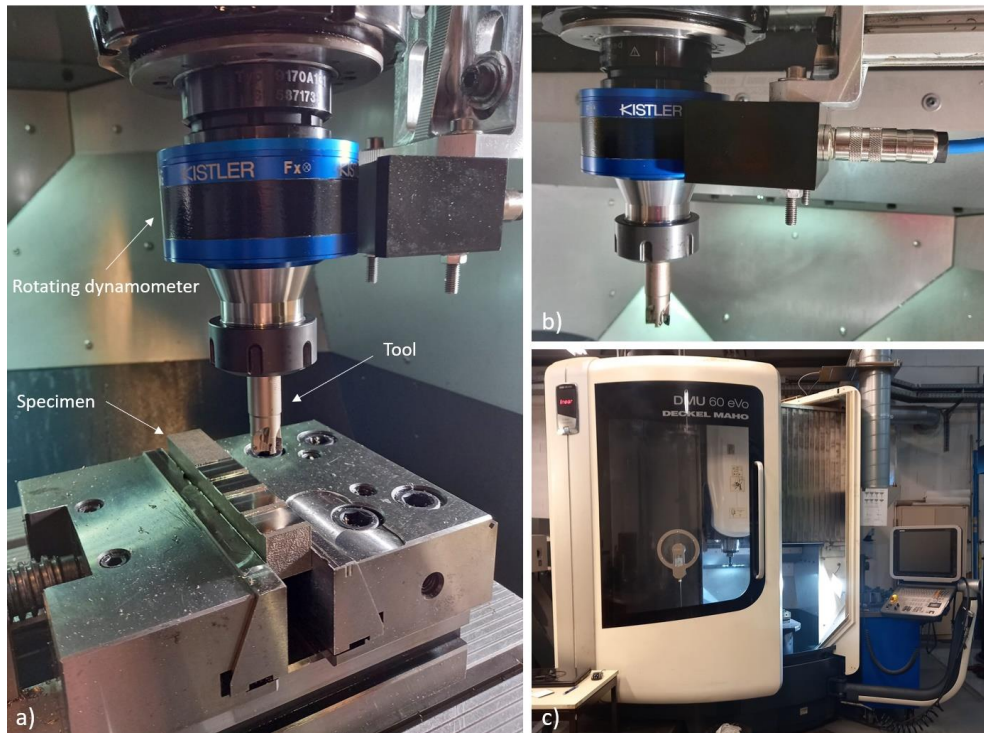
a) and b) Experimental setup with Kistler Rotating Cutting Force Dynamometer Type 9170 A, c) DMG Mori DMU 60 evo CNC used in the experimental tests.
